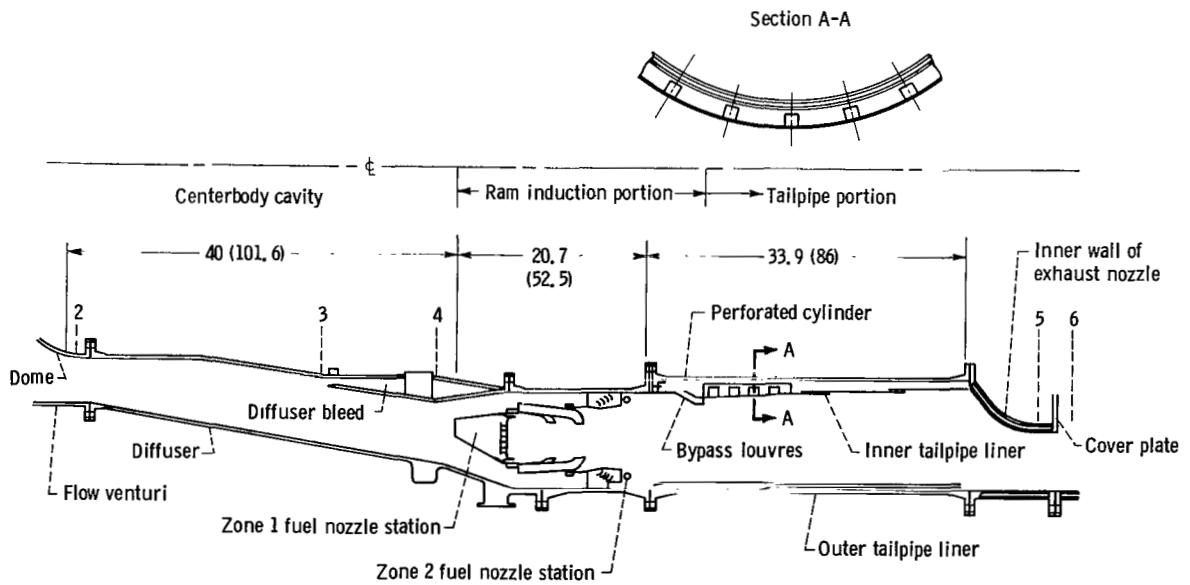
Cross section of duct burner. (Dimensions are in inches (cm).)
